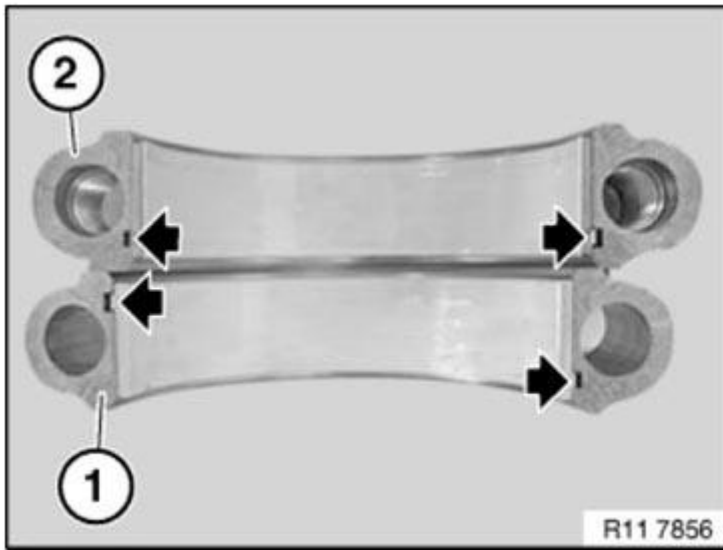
Locating Red Bearing Shell Fastening Notches And Blue Bearing Shell Fastening Notches
